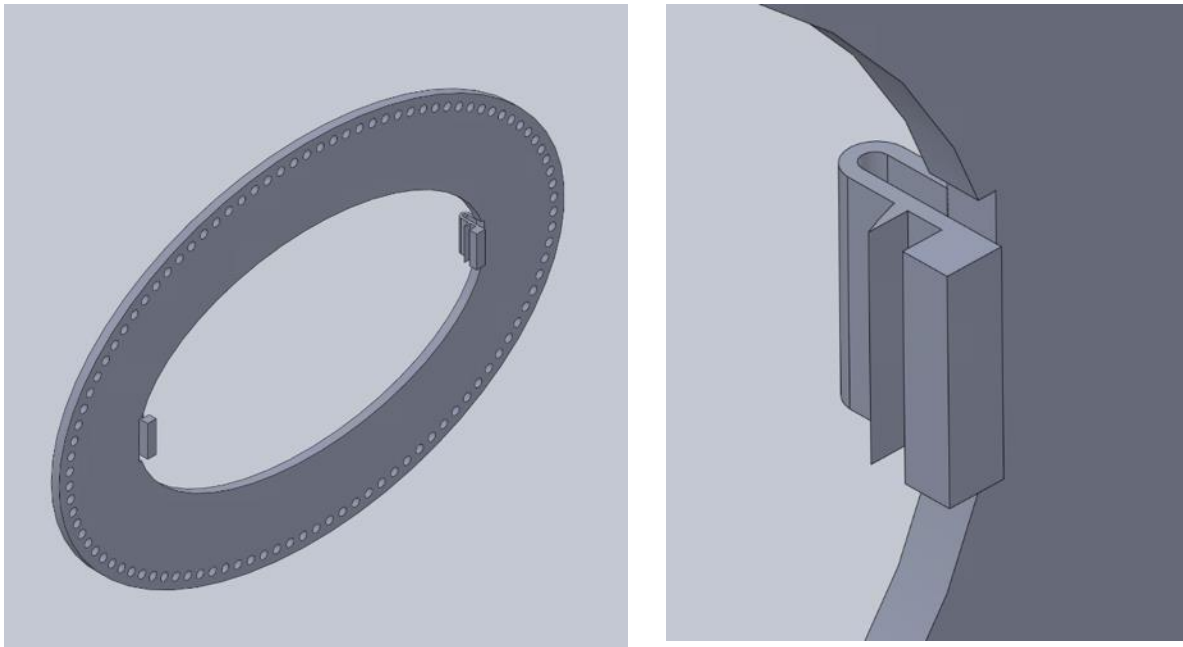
Pouch Attachment Piece Showing Clip Design
